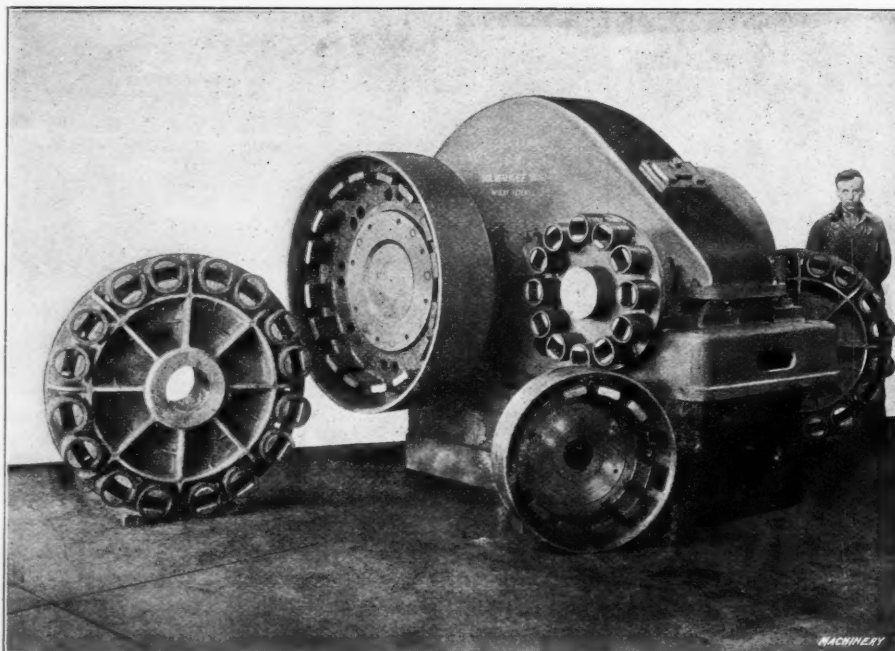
Enclosed Herringbone Gears for Rubber Mill. Illustration shows also Flexible Couplings used in connection with Rubber Mills
